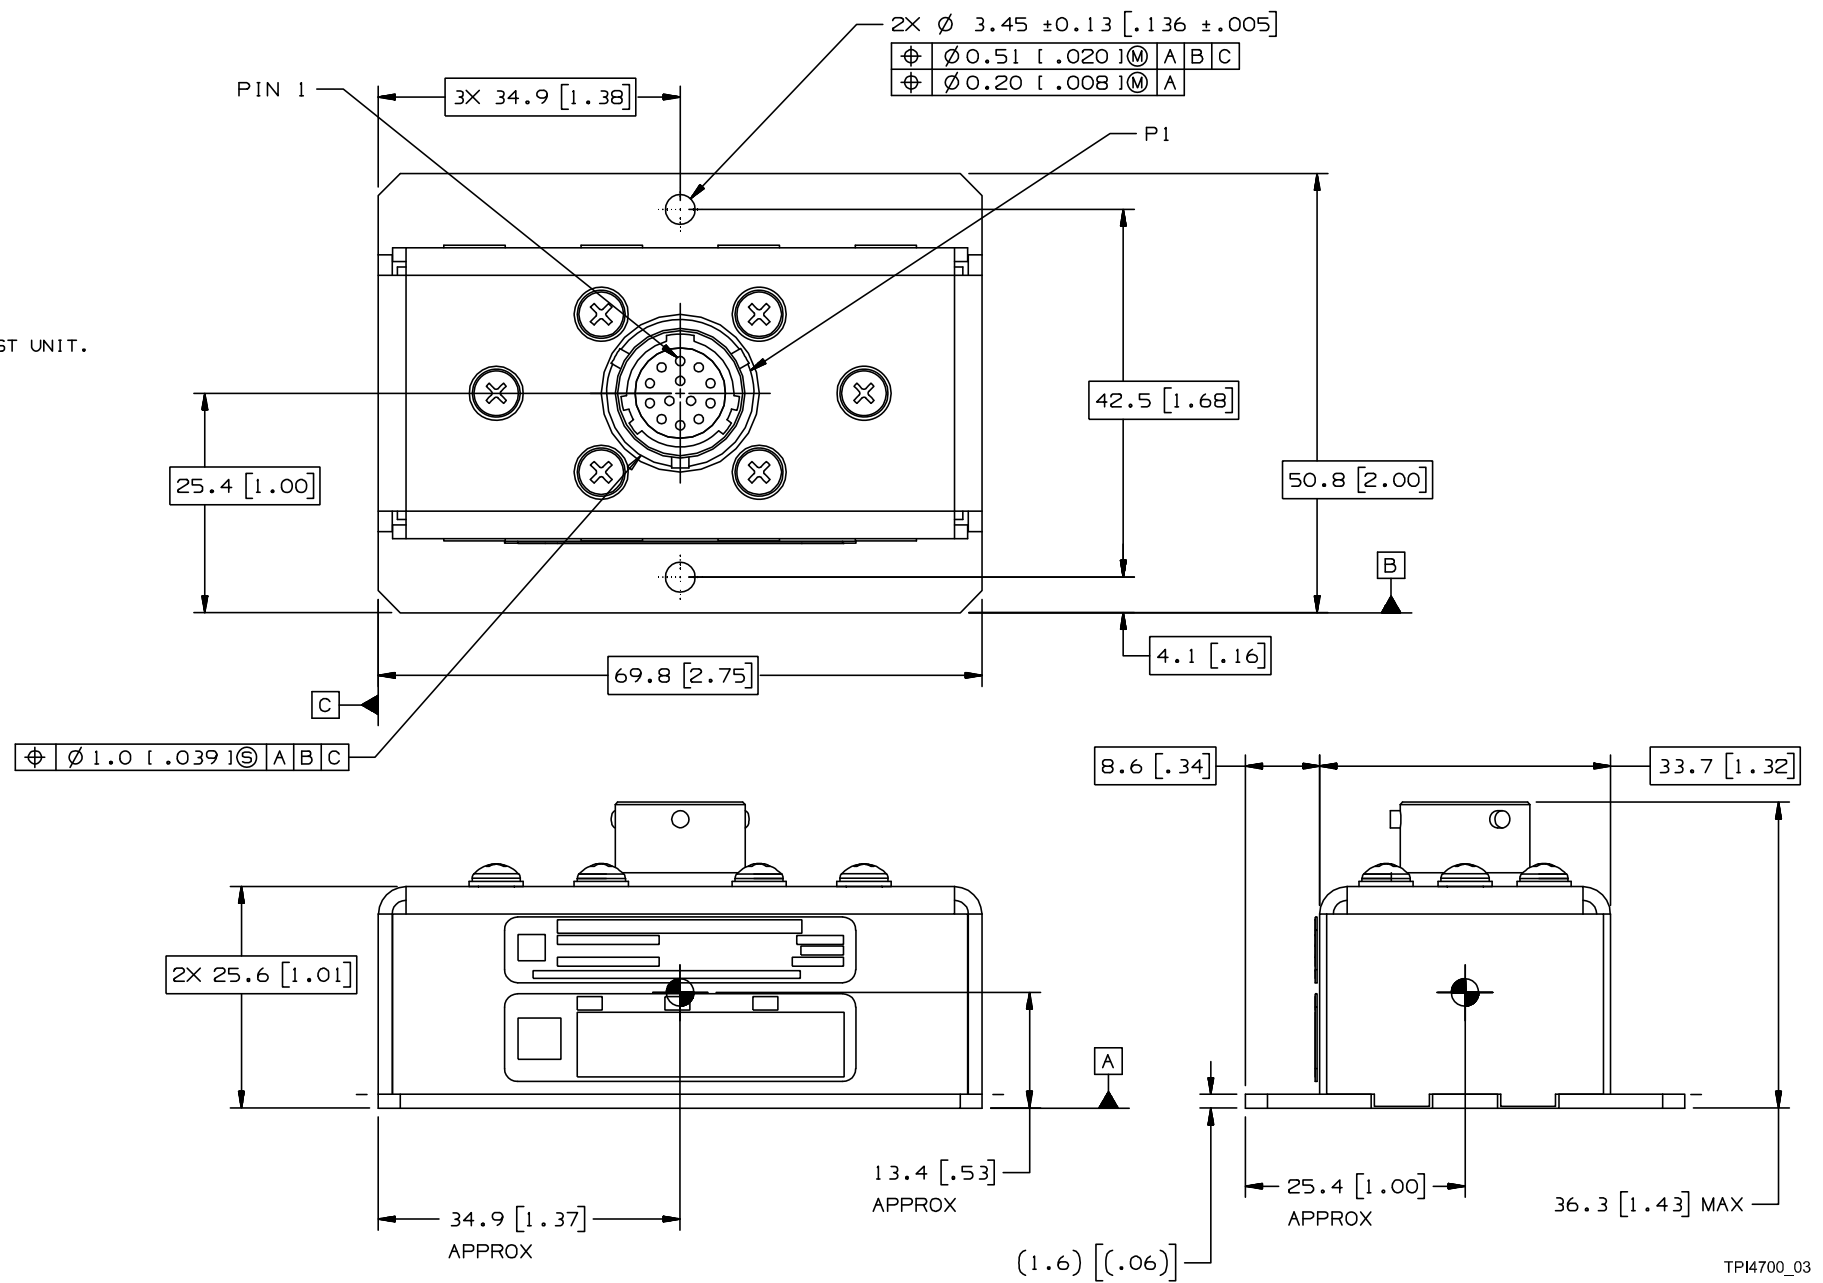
ECU-3000 Outline and Mounting Dimensions
